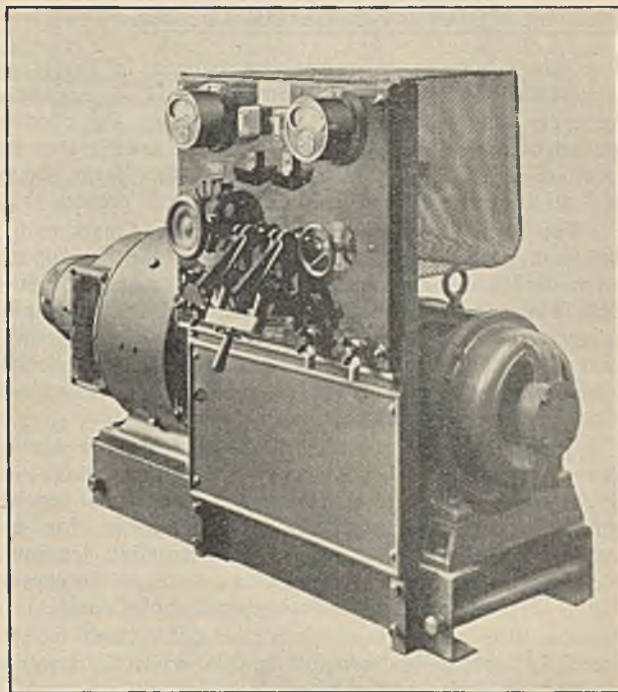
A.C.-D.C. Semi-portable Welding Set.
